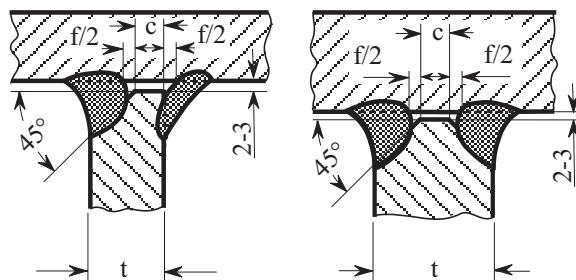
Single and double-bevel welds with unwelded root face and defined incomplete root penetration
